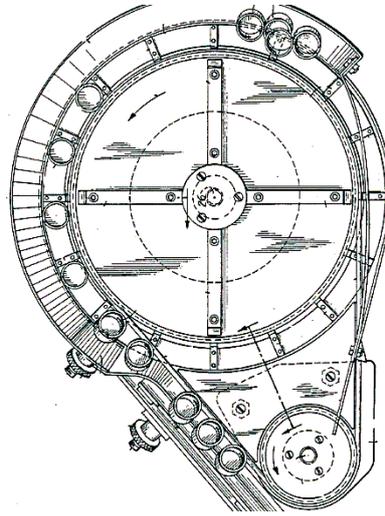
Rotary Feeder with Single Rotating Disc Which Rotate By Pulley and O-Ring [6]
